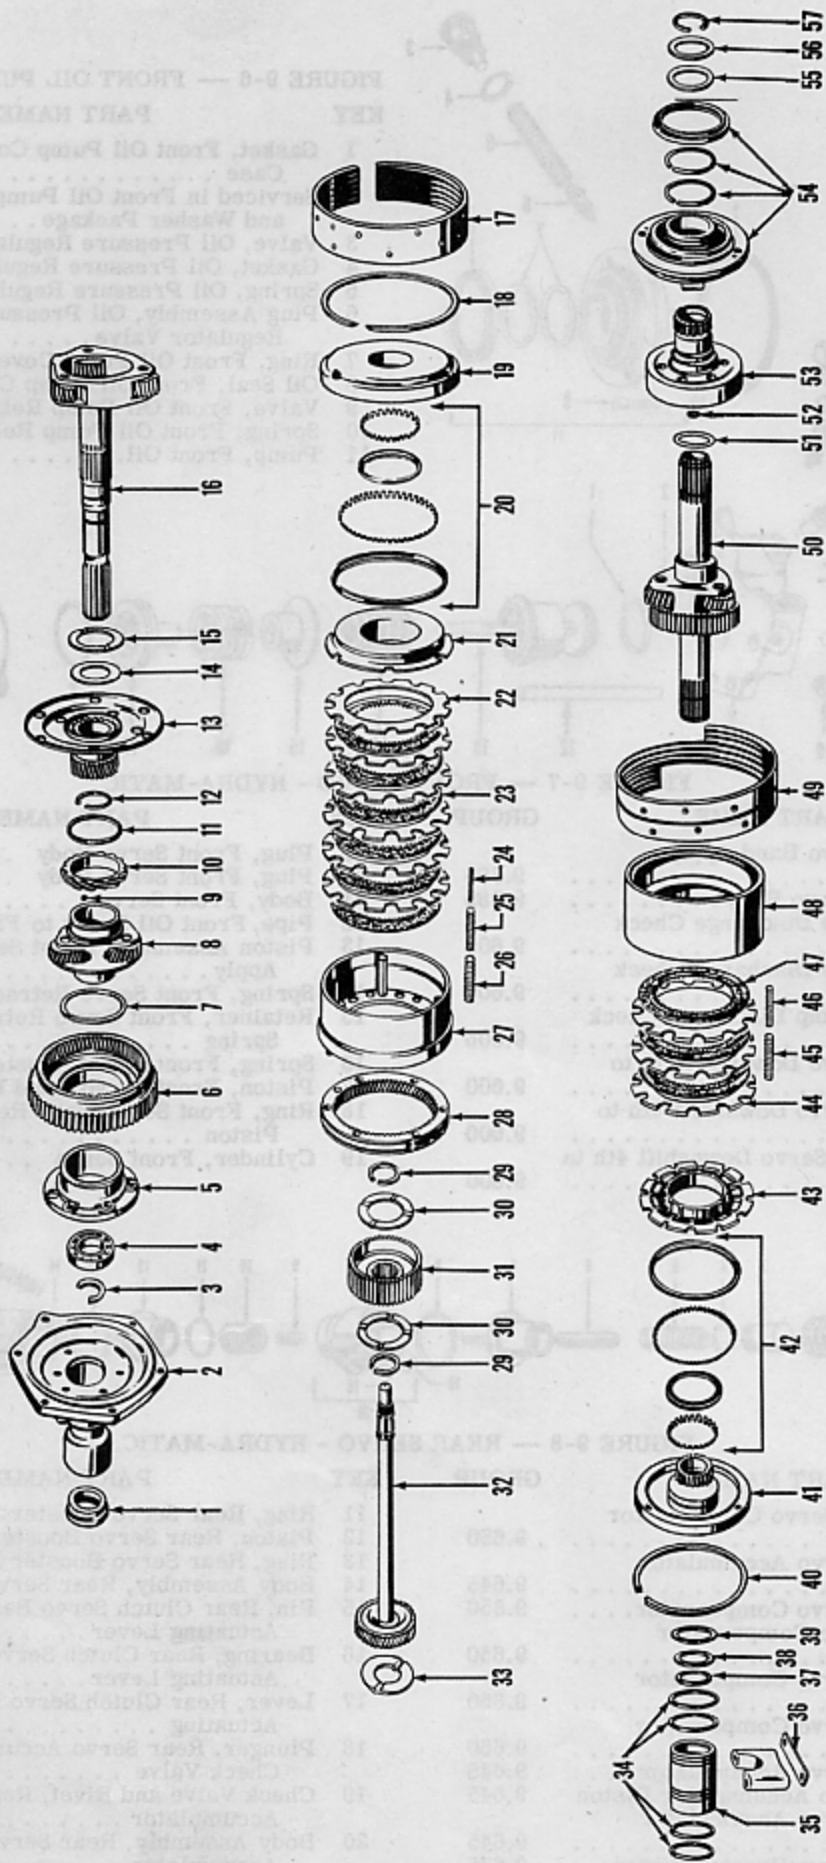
FRONT, REAR AND REVERSE UNITS - HYDRA-MATIC
